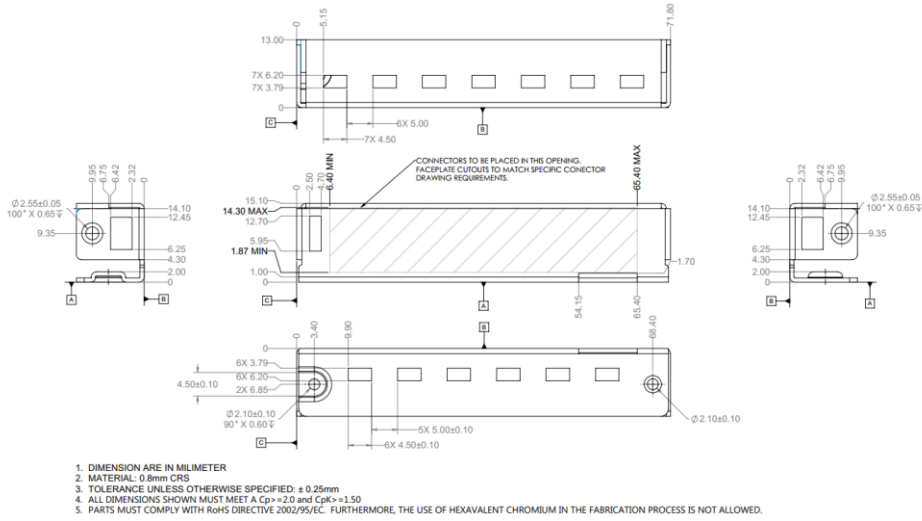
shows the standard Small Card form factor I/O bracket with a thumbscrew and pull tab assembly.
